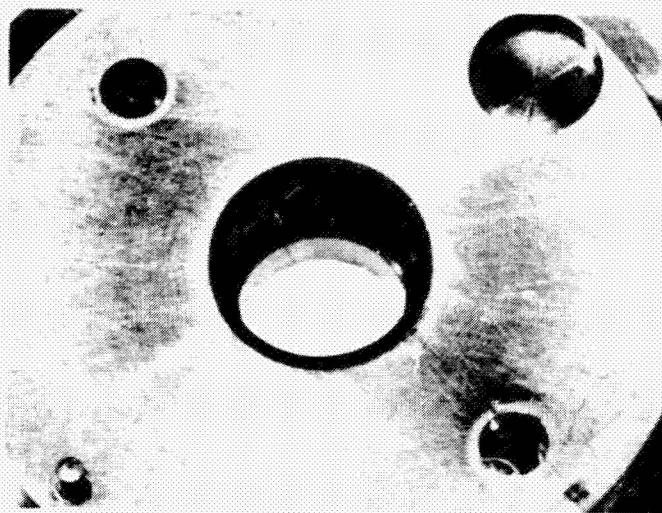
Valve Piston Shaft Seal After 12,000 Cycles, P/N X27449, S/N A Valve
